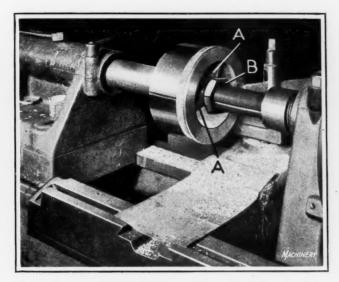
Screw-operated Expanding Mandrel for holding Side-rod Bearing Brasses for turning
